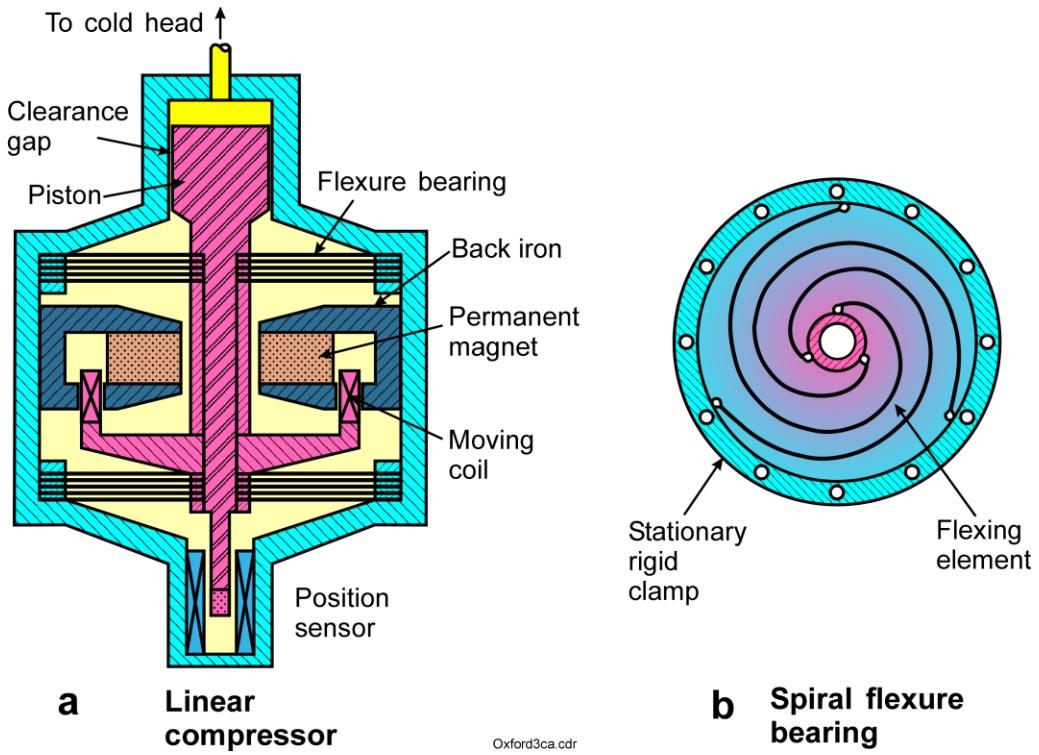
Schematic of (a) linear compressor with (b) spiral flexure bearings.
